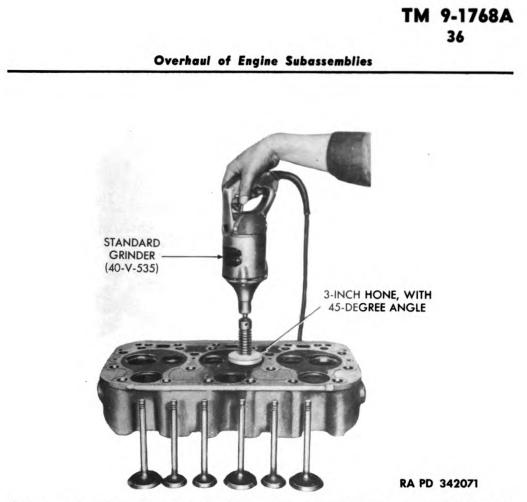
Grinding Intake Valve Seat, Using Grinder (40-V-535) and 3-inch Hone (45-degree Angle)
